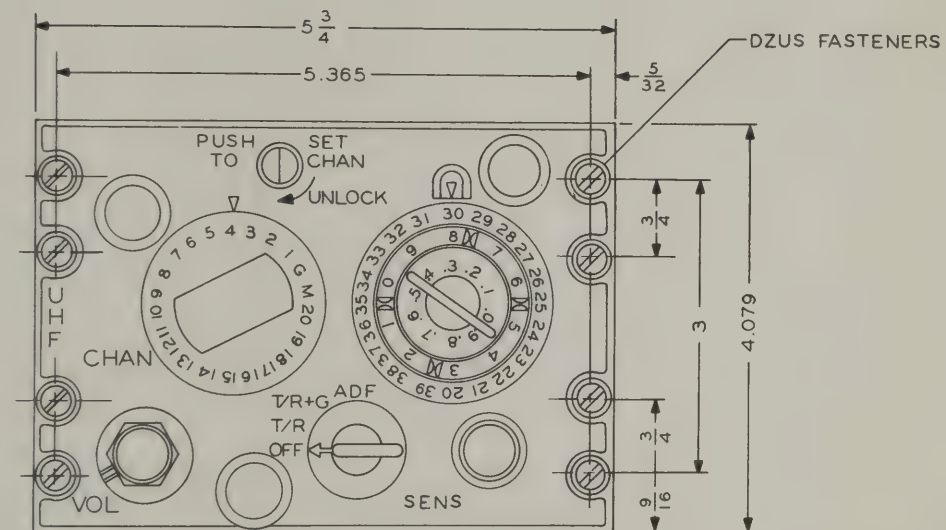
J. Radio Set Control C-1015/ARC-27A, Outline and Mounting Dimensions
